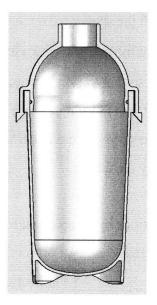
Prototype Cross-section. A cross-section of assembled prototype's solid model.
